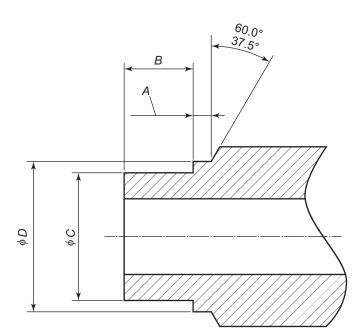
Socket Welding End Preparation for Class 800 and Class 1500
